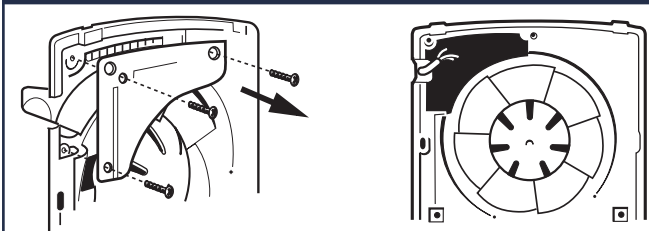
Attach the fan to the spacer section using 4 pan head screws
